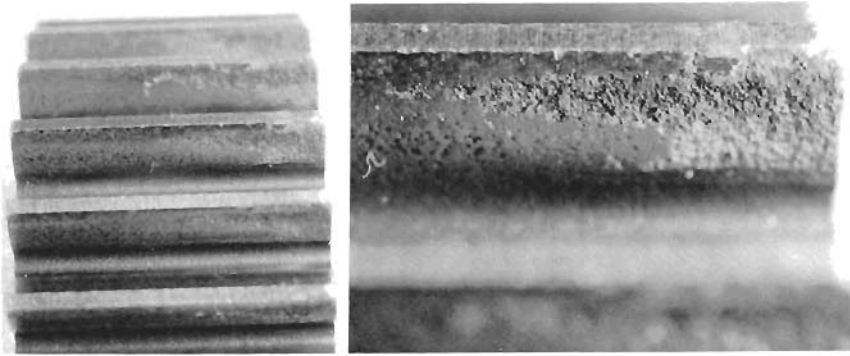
Spur gear used in a seasonal operation was at the top of an assembly, out of the oil, and subject to corrosion by cold weather condensation during the idle season.
